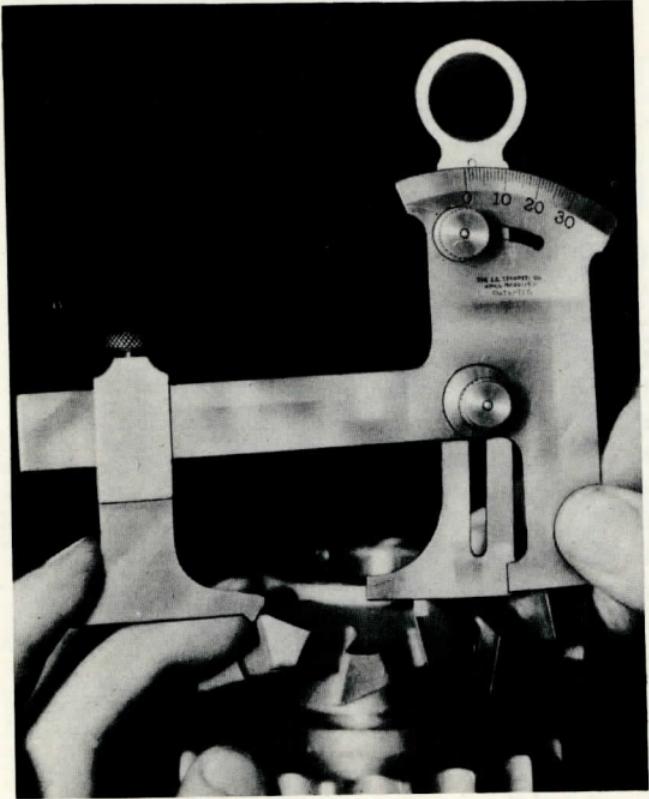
The Cutter Clearance Gage is adjustable for measuring the clearance angle of any type of cutter.
